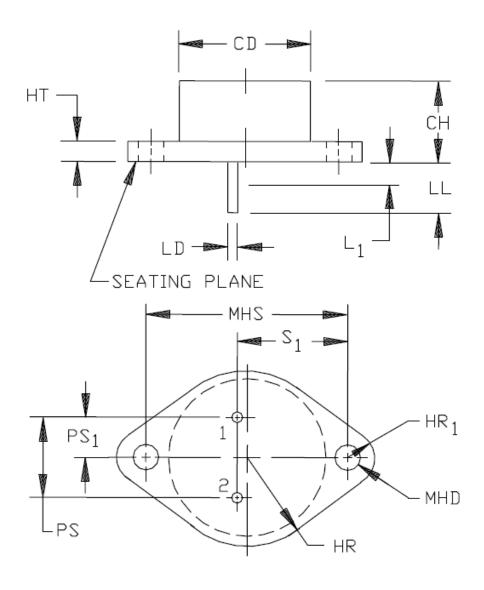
Physical dimensions (TO-204AA, formerly TO-3)
